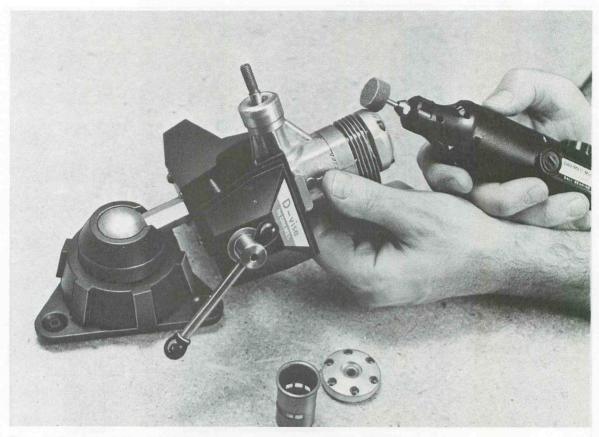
Called the D-Vise, this tool has an accessory to hold a Dremel Moto-Tool.
